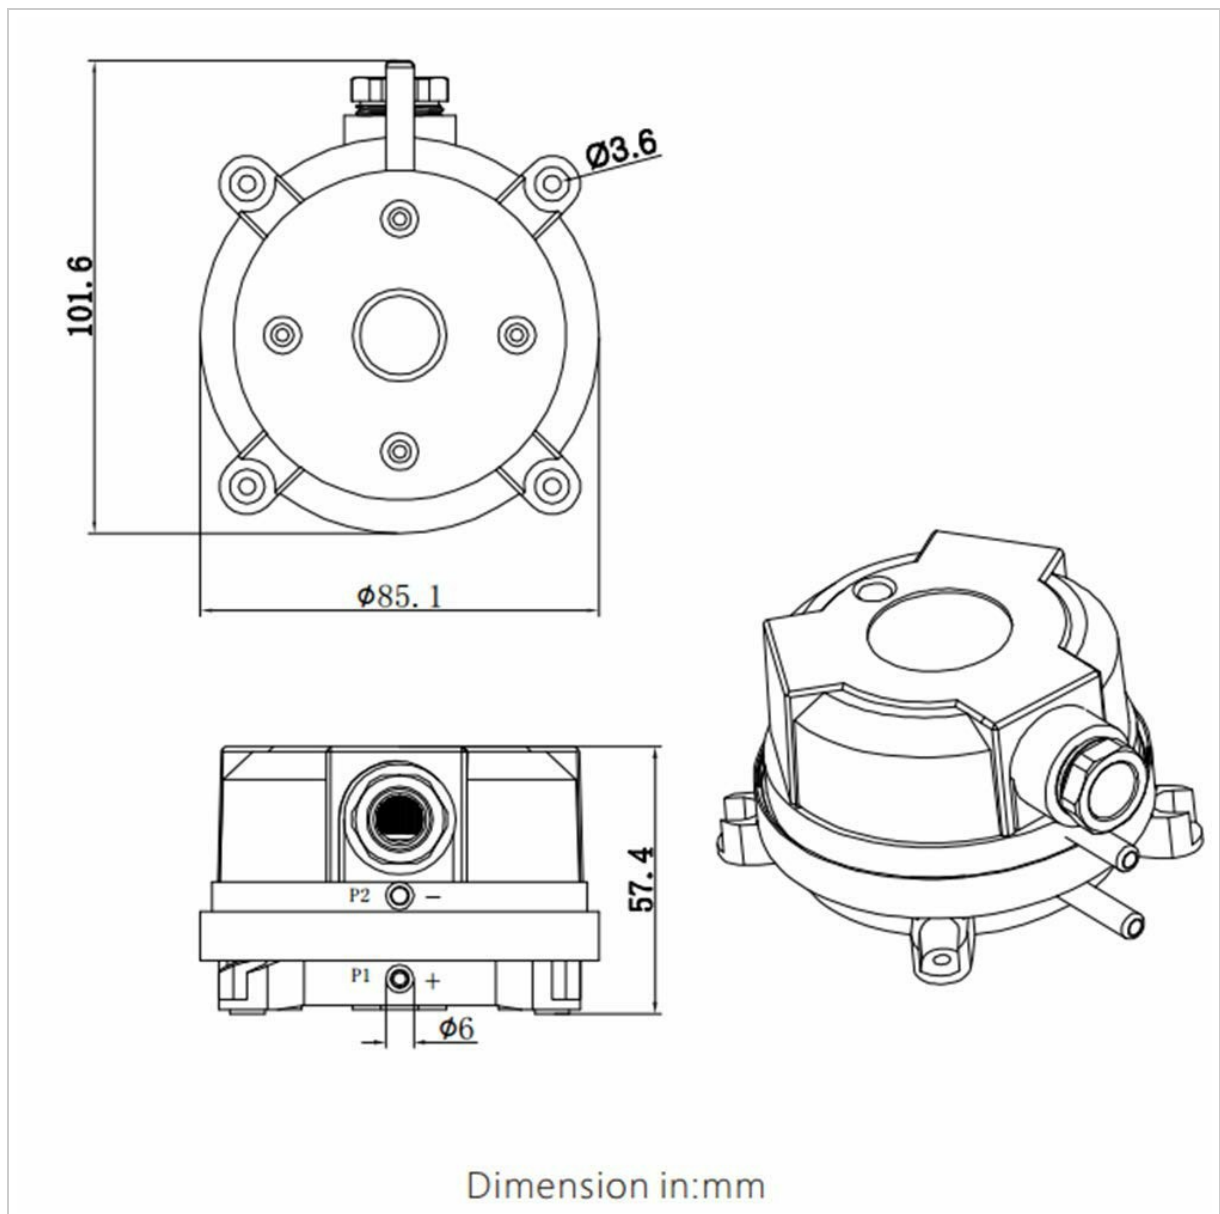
Dimensional drawing of the LEFOO LF32-02 switch (dimensions in mm).
